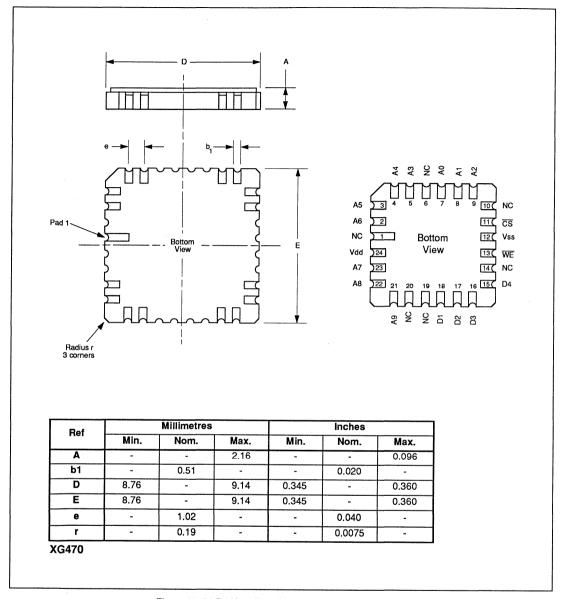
24-Pad Leadless Chip Carrier - Package Style L
